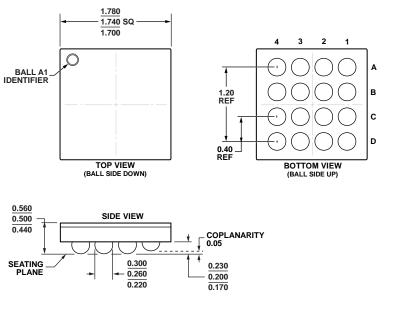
16-Ball Wafer Level Chip Scale Package [WLCSP] (CB-16-15) Dimensions shown in millimeters
